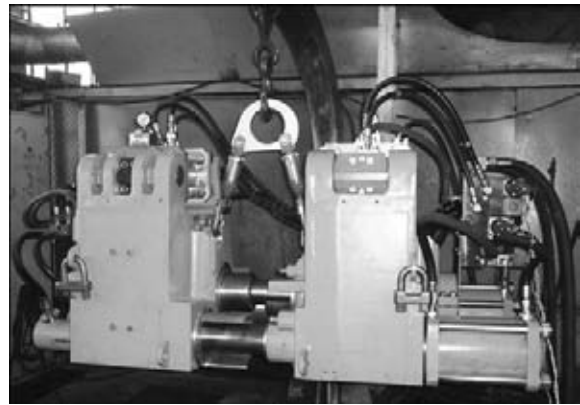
Machine K930 for welding of unlimited-length rails with tension
